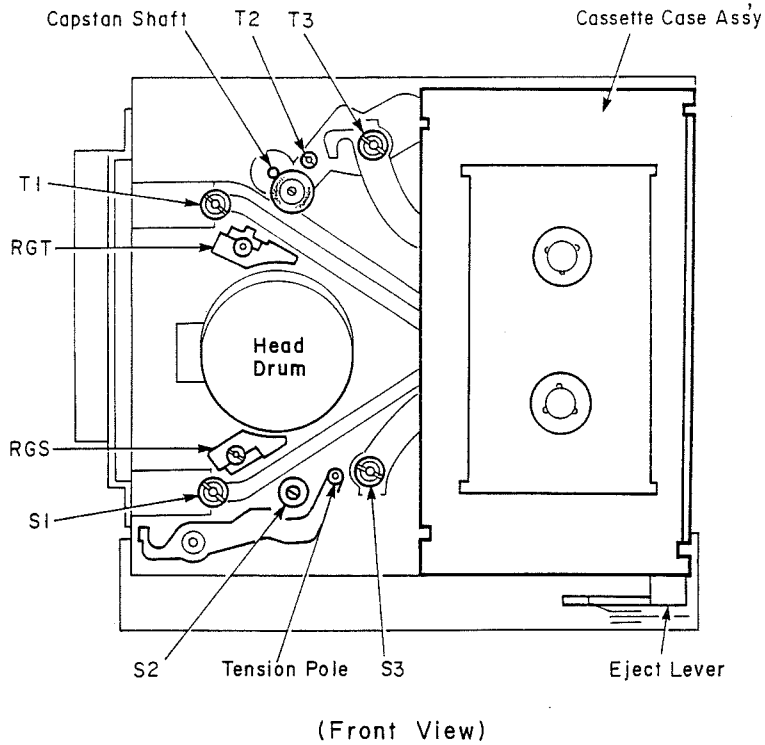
Parts Location for Mechanical Adjustment (Transport Mechanism Ass'y)
